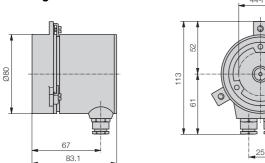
Basic unit for fitting to measuring instruments with revolving indicator shaft. The measuring instrument must have an extended indicator shaft at the back (1.5 mm dia., length 6...7 mm).
